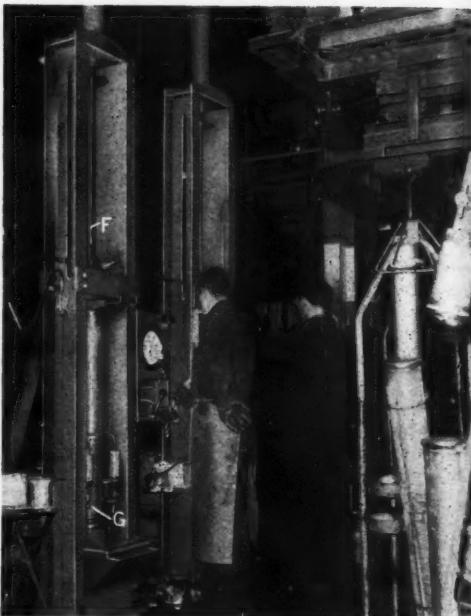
The welds are subsequently tested for porosity on hydraulic rigs of the design here shown, at a pressure of 3,000 lb. per sq. in. Fluid used for testing is admitted through the sealing-plug and ram
